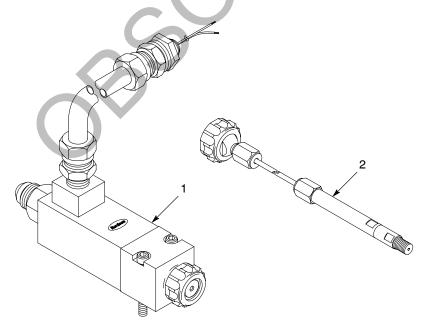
CleanSpray II Spray Gun and Extension Assembly
